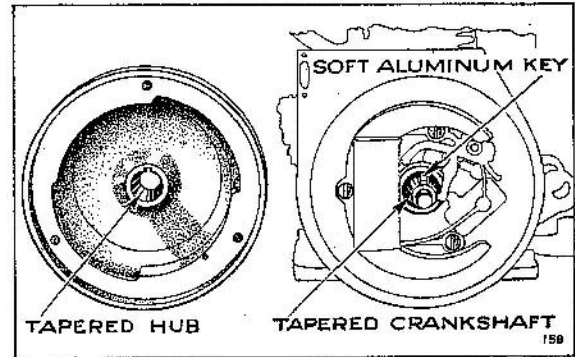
MAGNETO FLYWHEEL AND CRANKSHAFT TAPER
